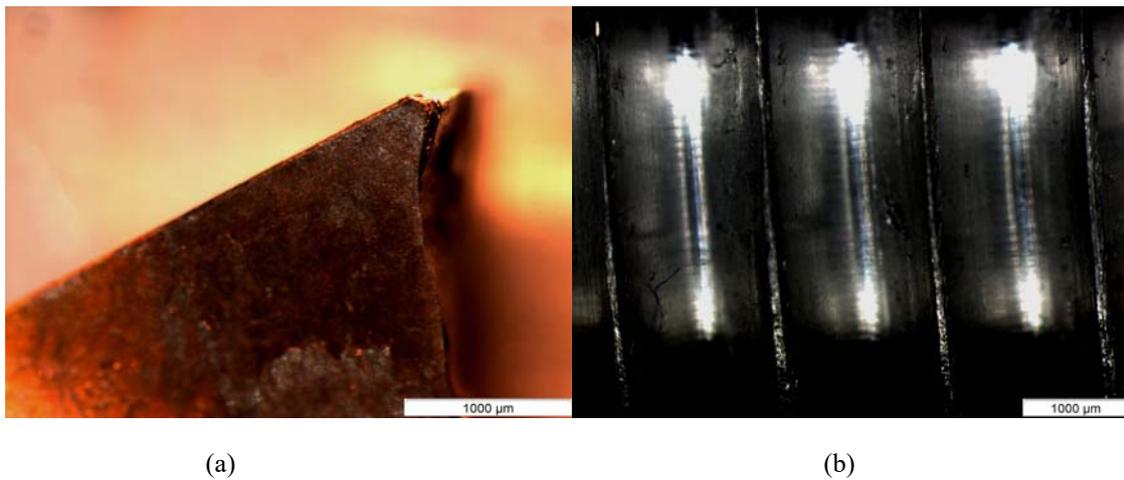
Flank infeed results (a), worn tool, (b) thread surface finish.
